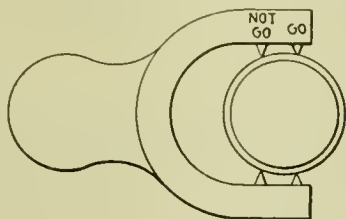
A Point Thread Gage for Rapid Inspection
